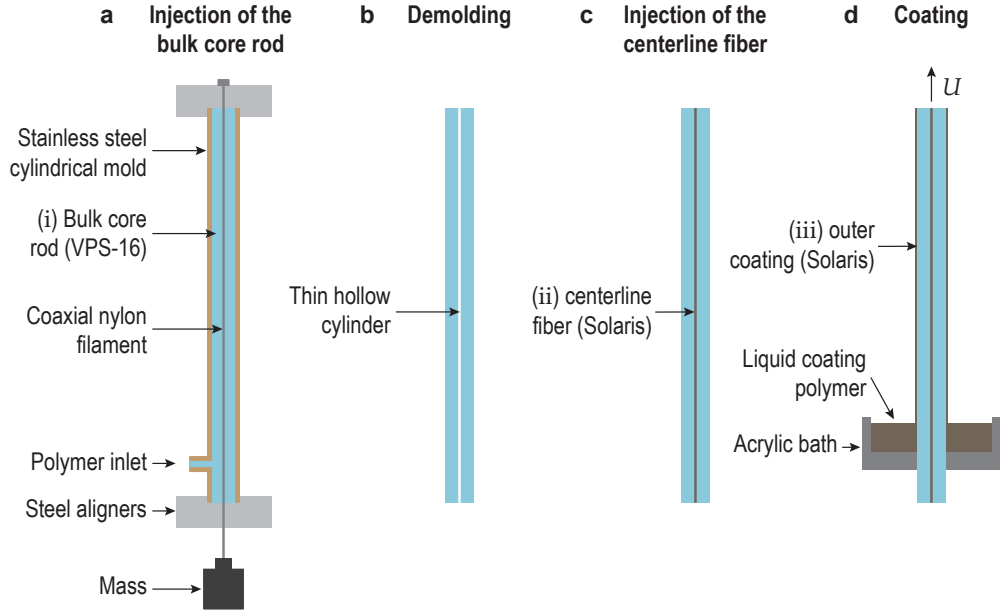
Schematics of the fabrication protocol of the coaxial composite VPS rods used for  $\mu$ CT imaging. a, The bulk core rod was cast inside a stainless steel cylindrical tube by injecting the liquid polymer (VPS-16) through the lower inlet of the mold. A weight of mass  $M = 200$  g, together with machined aligners, ensured coaxiality of the nylon filament. b, Demolding of the bulk core rod from the mold and extraction of the nylon fiber yielded a monolithic polymeric rod with a void along its centerline. c, Injection of liquid polymer (Solaris) inside the void generated the material centerline. d, A dip-coating technique [79] was used to uniformly deposit an outer polymeric coating layer on the bulk core rod; the bulk core rod is pulled out vertically from a circular bath containing uncured Solaris at a constant velocity  $U$ .
